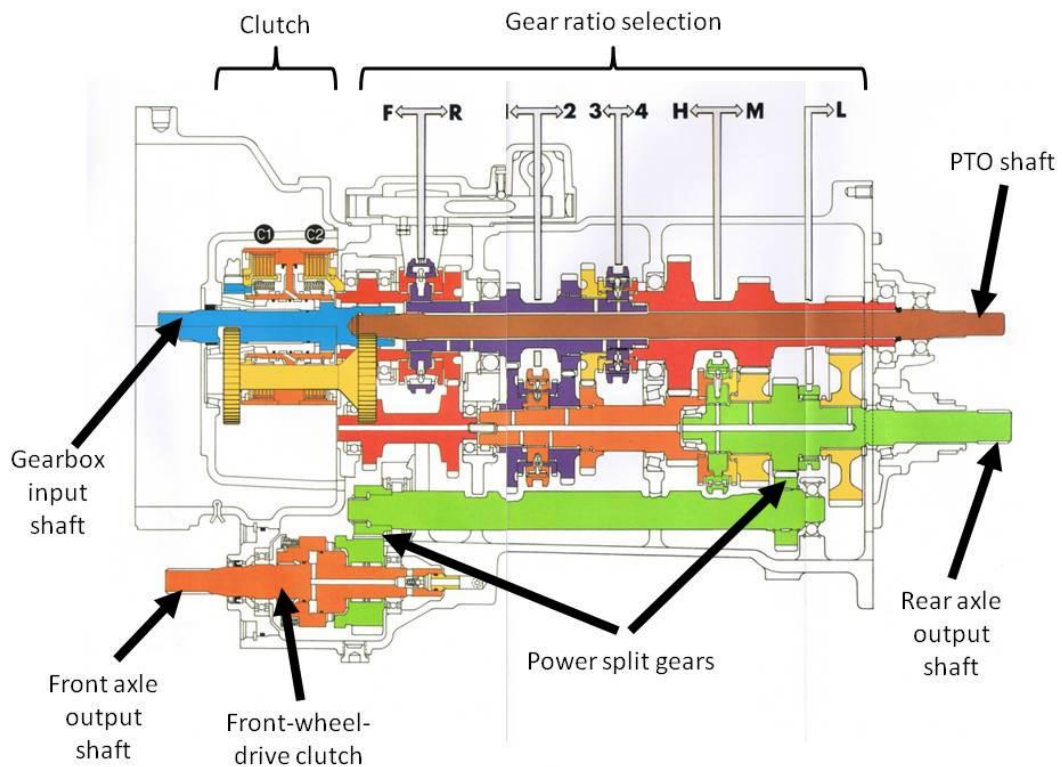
Schematic drawing of the main gearbox of the TS90. (Adapted from: CNH, 1998)
